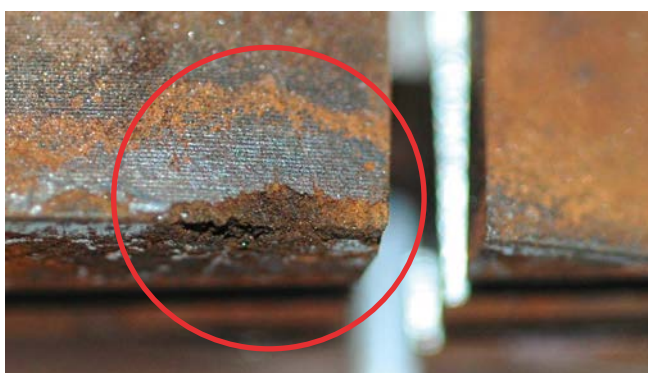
Cast iron insert sample M5 31:1 after removal from the sample holder. The cut to the right hand side of the visible corrosion loss, shows where the saw had cut through the copper canister and into the cast iron insert during sampling in the glovebox. The corrosion extends over the edge of the cast iron insert.
